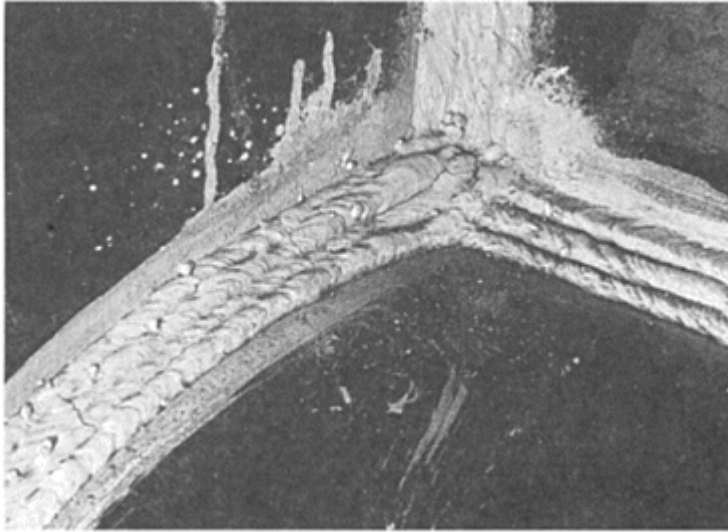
Photograph of fillet weld finish (containing crack) showing how photographs can be used as reference standards.
